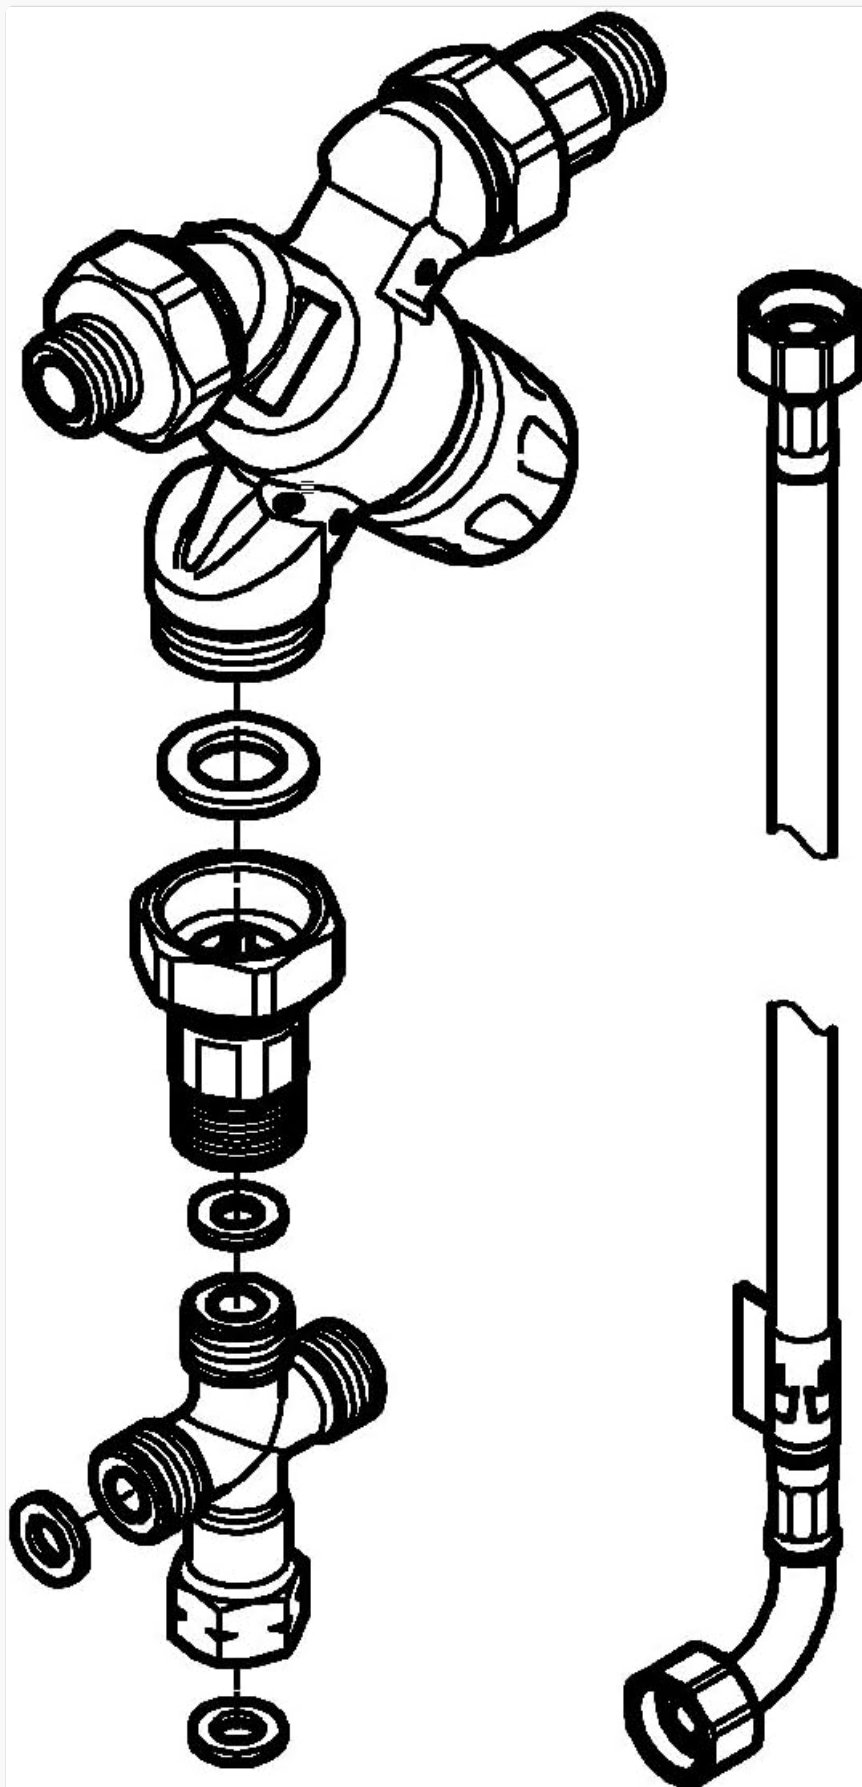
Exploded view of the mixing valve and associated plumbing connections. This diagram illustrates the individual components of the mixing valve and how they connect, including seals and threaded fittings, crucial for correct assembly.
